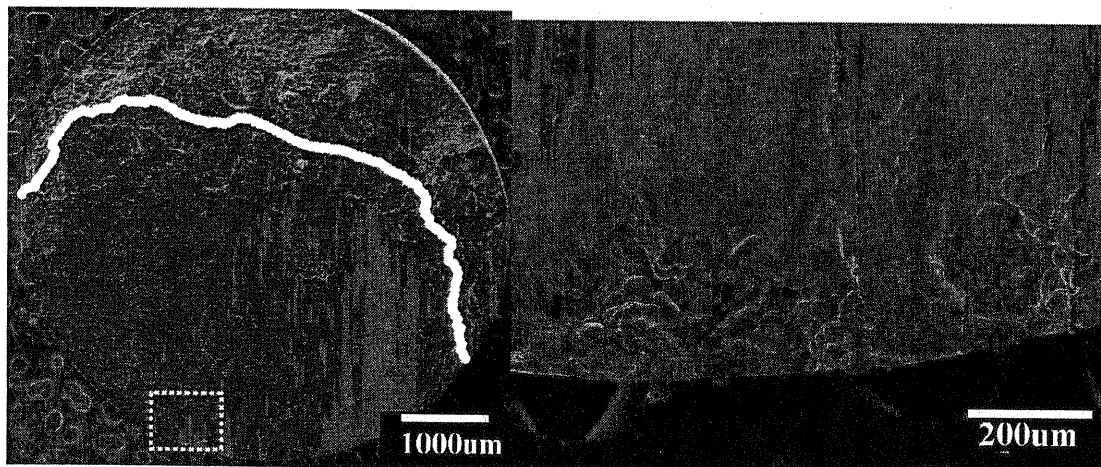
Typical fracture surface of a microporous specimen from Sigl et al.⁷
